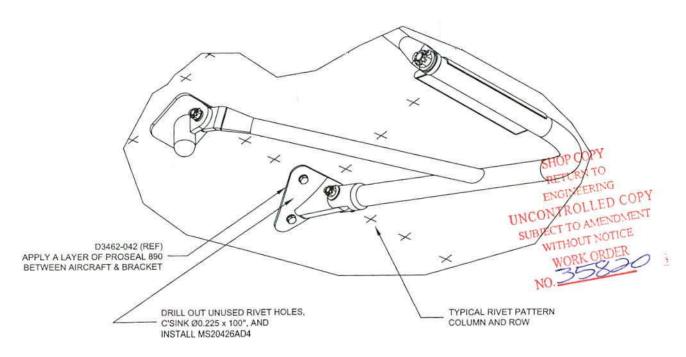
Detail View D3462-042 Bracket Assembly (-032 Installation, Shown) D3462-041, (-031 Installation Opposite)
